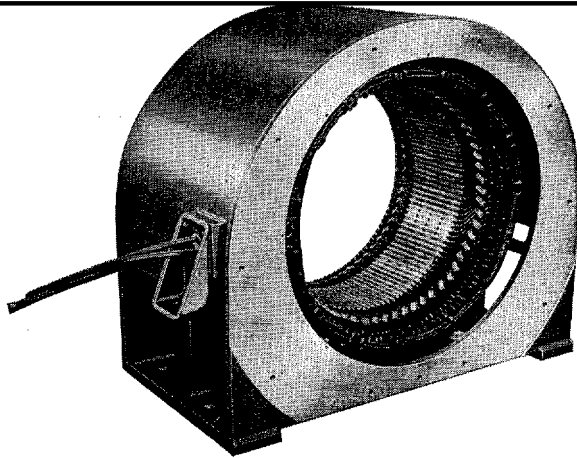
Wound stator for large, end-shield bearing, squirrel-cage induction motor.
